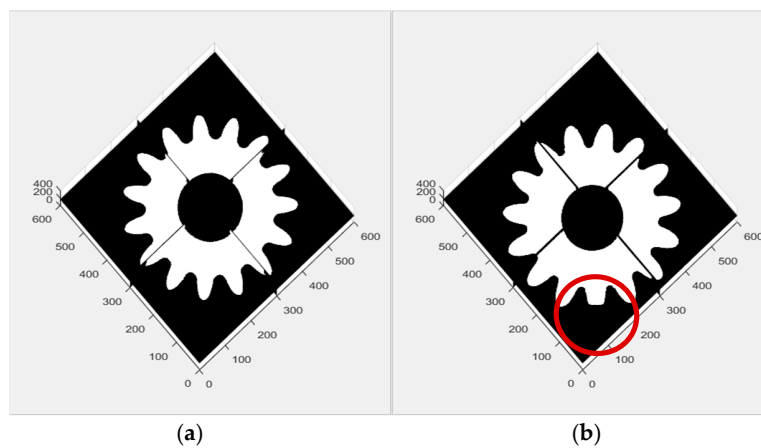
2D slices of the reconstructed 3D images of the gear part without (a) and with (b) defect. (a) Without defect; (b) with defect.
